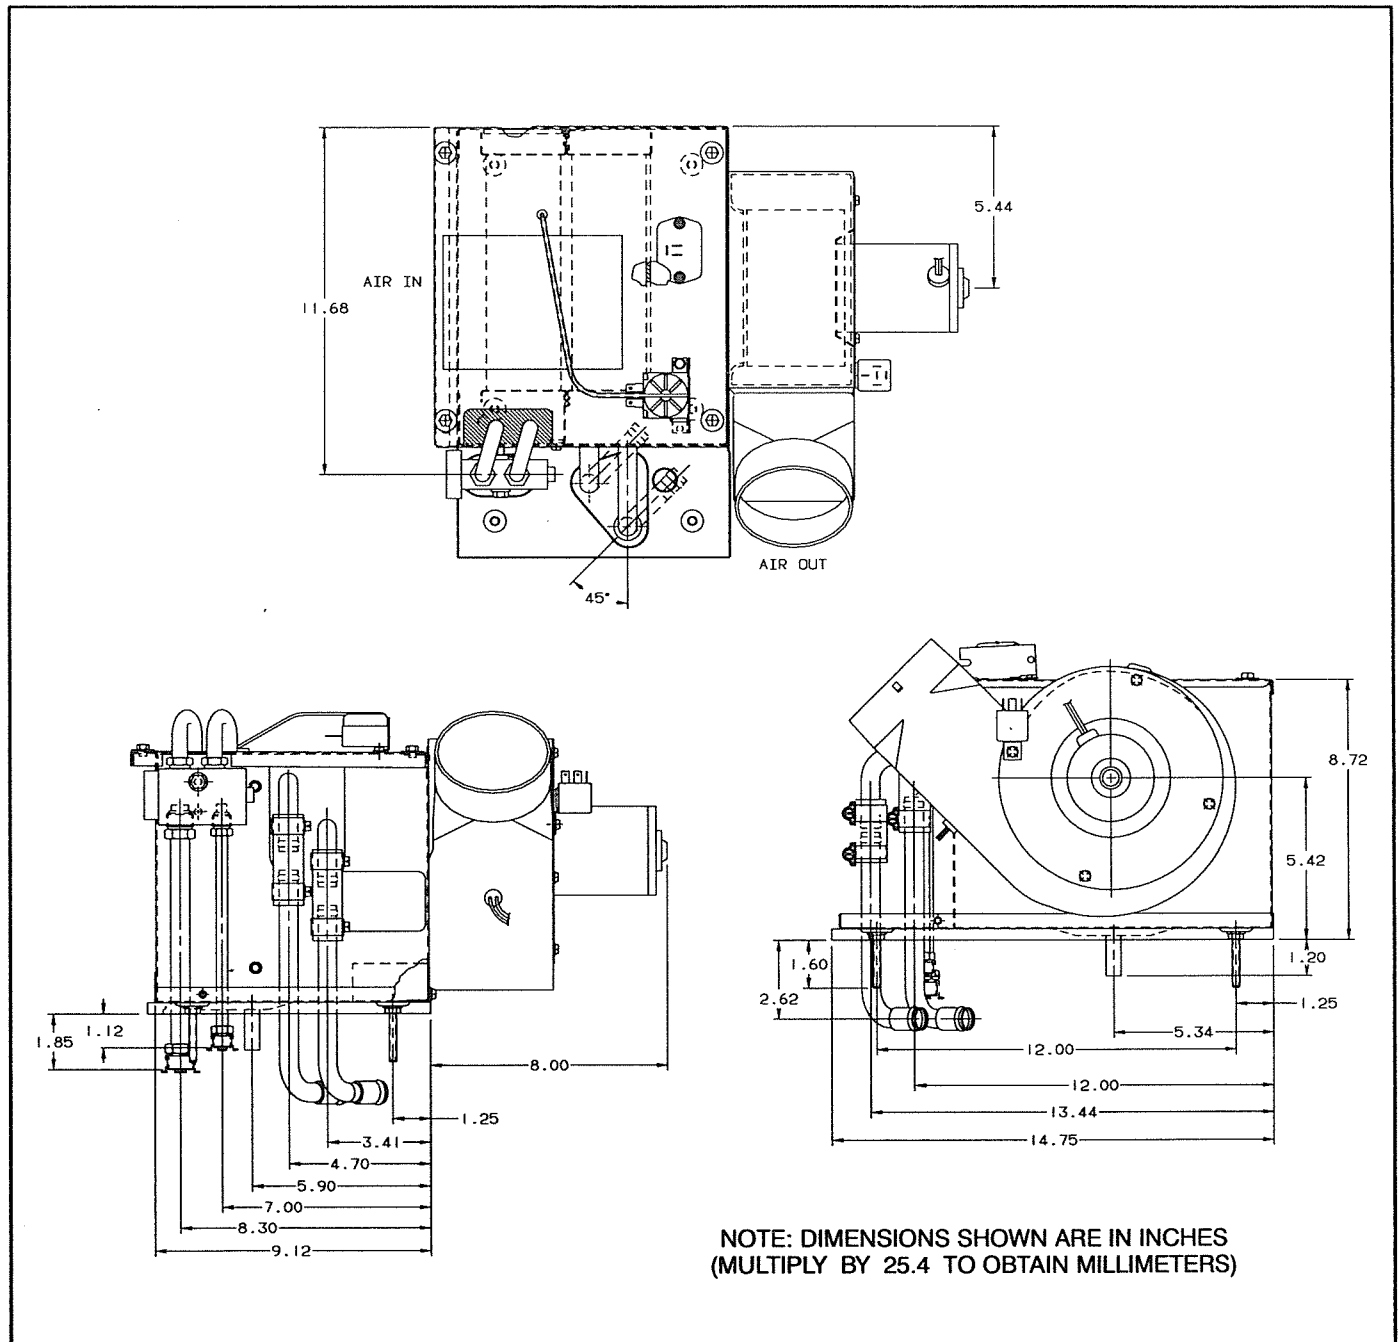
EVAPORATOR/HEATER ASSEMBLY DIMENSIONS
